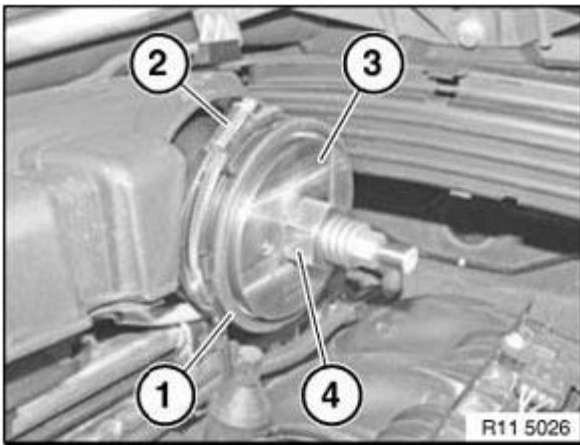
Identifying Seal Clean-Air Pipe And Special Tool
